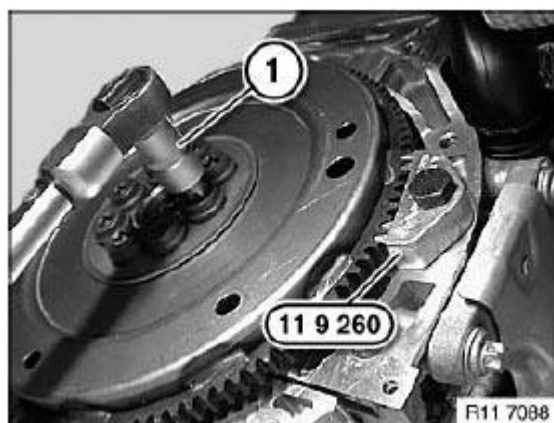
Securing Flywheel Using Special Tool 11 9 260
